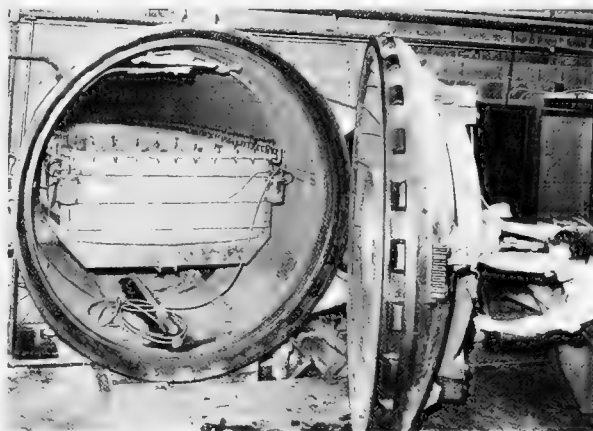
Mold assembly inside of autoclave (Courtesy Universal Molded Products Corporation)
